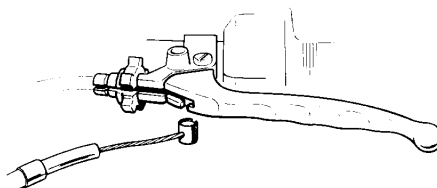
Removal of the Clutch Cable at the Handlebar.
